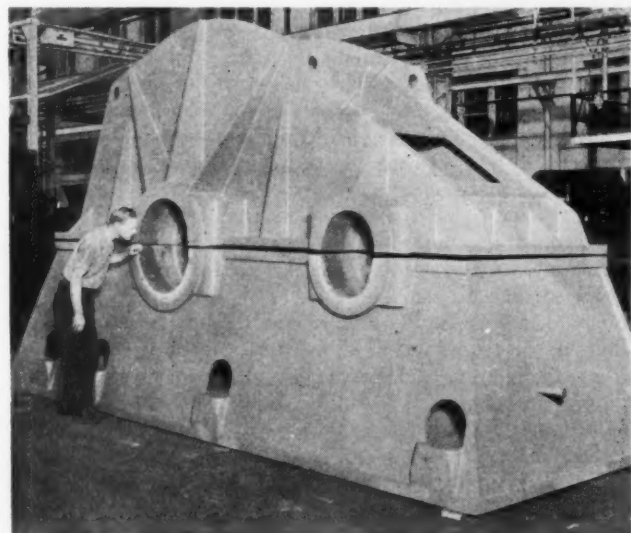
WELDED REDUCTION-GEAR HOUSING
